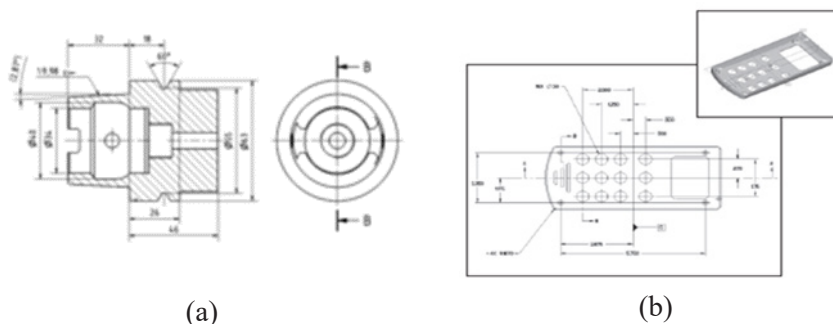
(a) Engineering drawing of a machine tool part (b) Schematics of cellular phone
